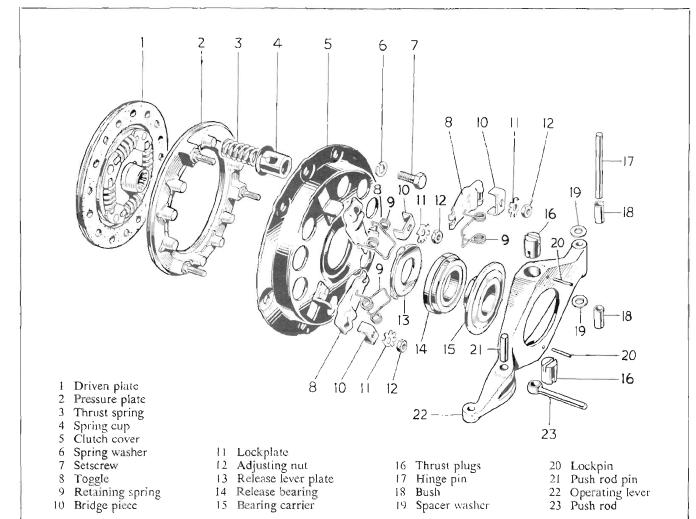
Exploded clutch unit (Herald 1200, 12/50 and Spitfire)
